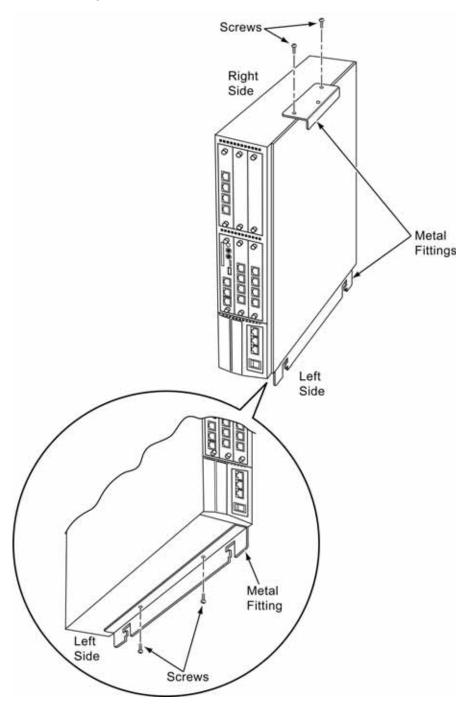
Securing Metal Fittings to Chassis with Screws
